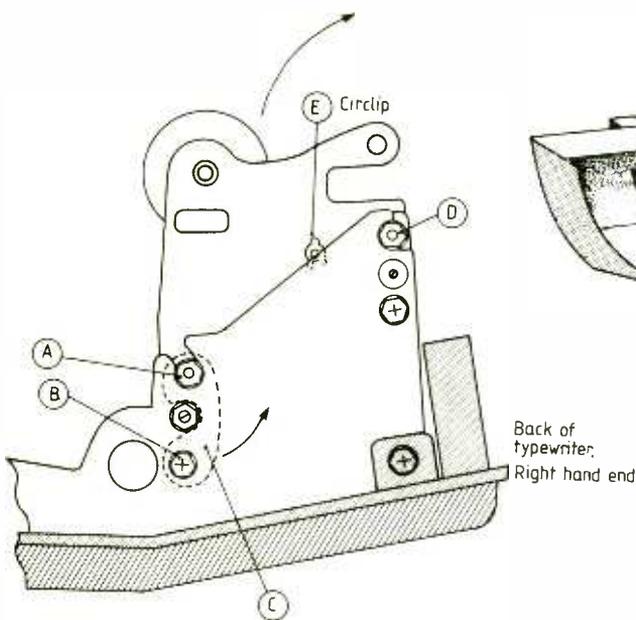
Platen roller must be swung upwards to allow access for fitting the paper-out detector. Remove screw B on the right-hand roller support bracket. Swing plate C clear on the right-hand bracket and swing the platen roller assembly upwards, pivoting it about nut D.
